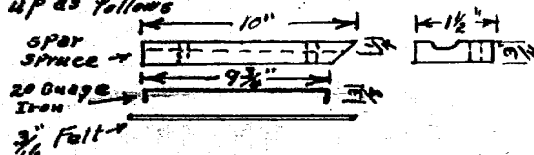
K End of Tank Mounting strap. Formed As Below With Fold Back of 1". Bolted to Bracket 1-A With 2 #10 AN Bolts.
